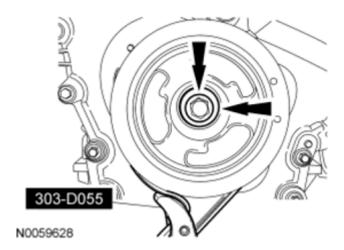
Locating Crankshaft Pulley Bolt And Washer Courtesy of FORD MOTOR CO.
